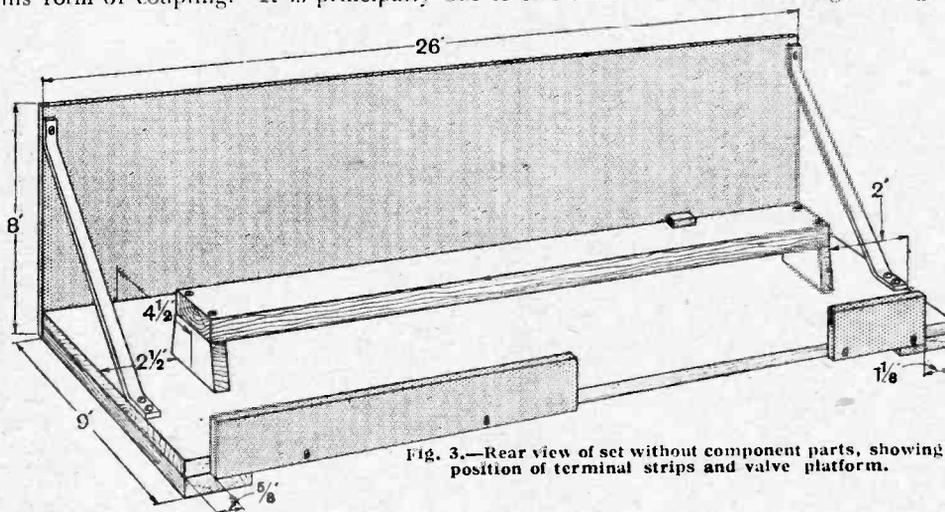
Rear view of set without component parts, showing position of terminal strips and valve platform.
